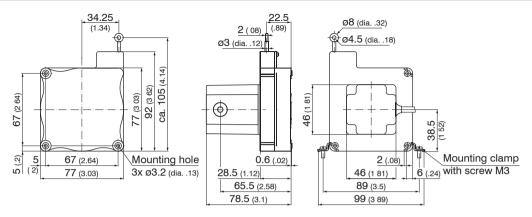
Dimensional drawing WPS-...-MK77-CR, with potentiometer and radial cable, dimensions in mm (inches), not to scale
